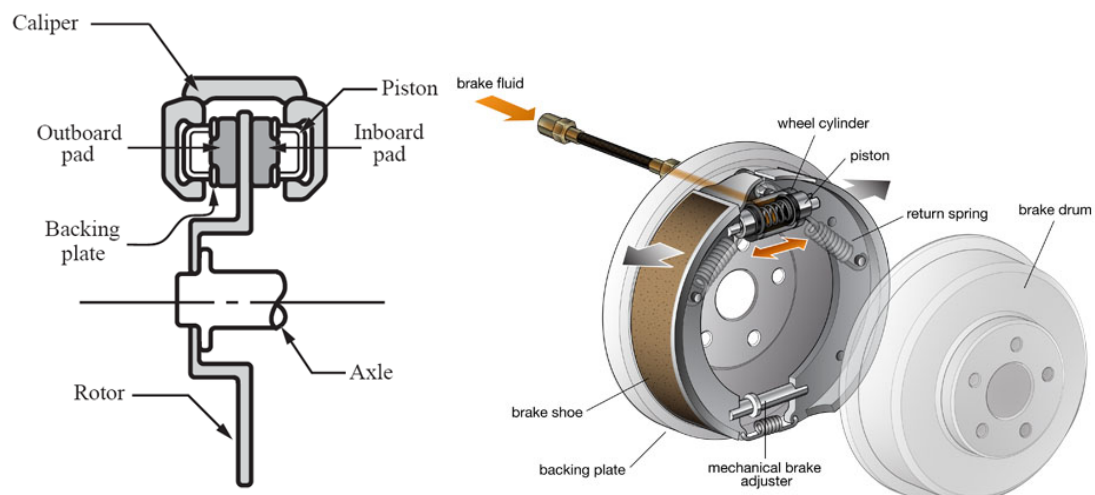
(a) Cross-section of a simplified disc brake. The wheel (not shown) is attached to the axle flange. The disc brake shown in this Figure has a fixed caliper⁴ (b) assembly of drum brake⁵
